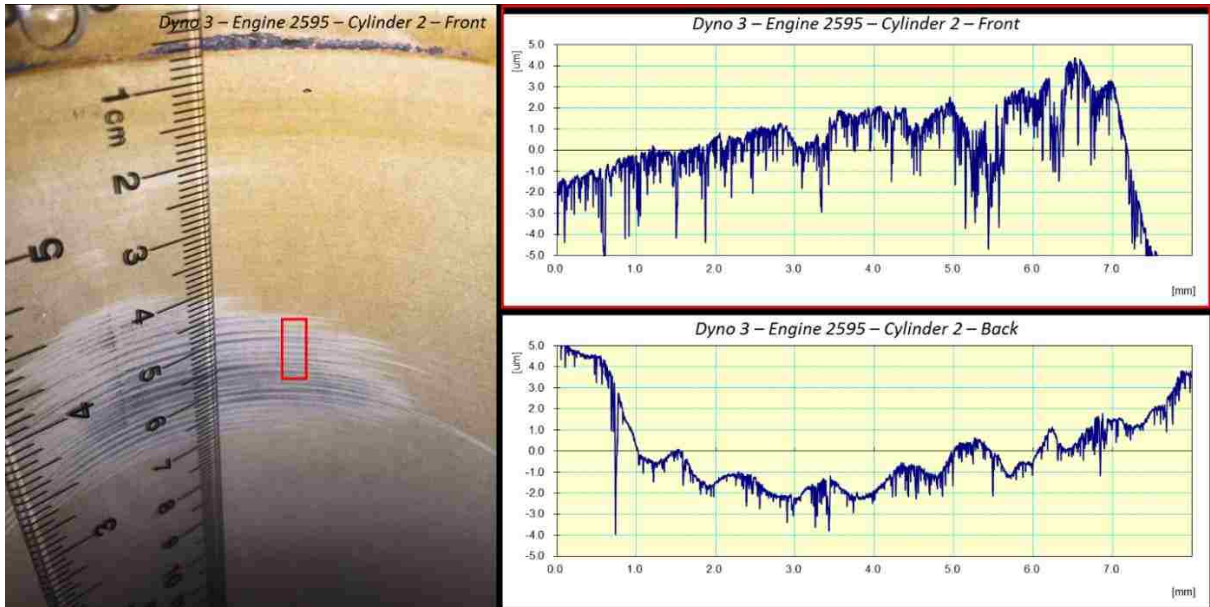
Dynamometer 3 - Engine 2595 - Profilometry - Ring Flutter - Cylinder 2
